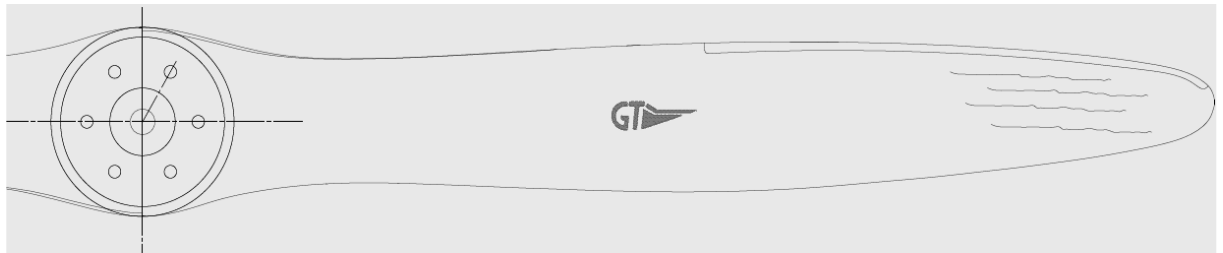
LONGITUDINAL CRACKS AT THE BLADE'S TIP
